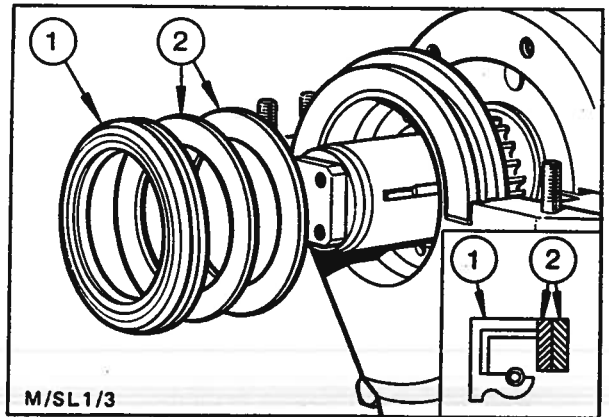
Assembling Crankshaft Pulley Oil Seal into Timing Gear Housing Cover
